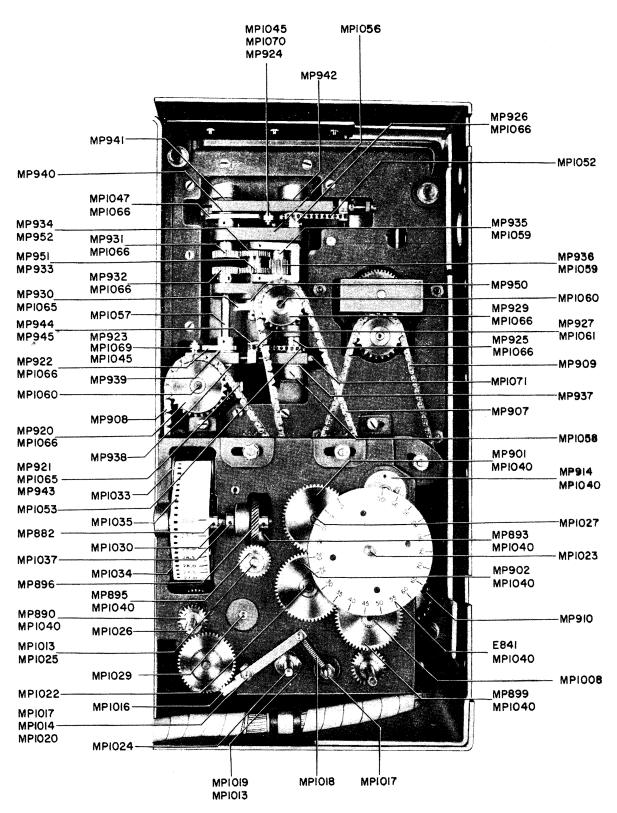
Tuning and Coupling Mechanism, L cati n f Parts on Front of Gear Train
